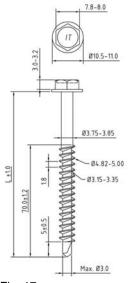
ISO-TAK Steel Deck Screw DB 48 - Ø 4,8 mm, tempered steel SHE 1022, drill point, hexagon head
